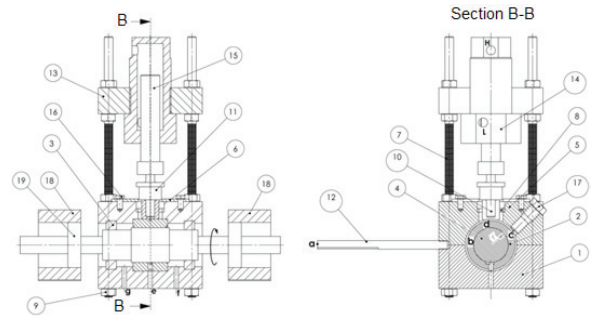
The bearing-housing assembly (1-lower bracket; 2-sleeve; 3-seal; 4-shaft; 5-top bracket; 6-top cover with seal; 7-screw; 8-seal; 9-nut; 10-lever with which the bearing is loaded; 11-force sensor; 12-beam; 13-cylinder carrier; 14-cylinder; 15-piston; 16-screw; 17-thermocouple; 18-roller bearing housing; 19-roller bearing; a-place of friction force measurement; c- thermocouple temperature measurement location; d-place of bearing loading by radial force, g, e, f- hydraulic ports)
